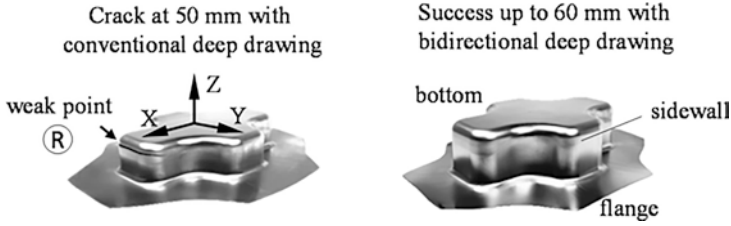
Parts with conventional (left) and bidirectional (right) deep drawing
